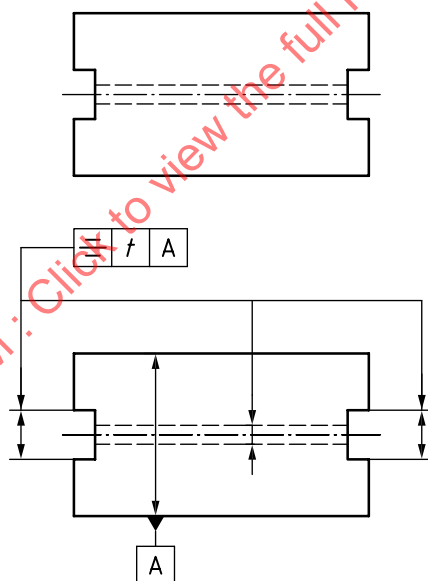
Drawing and meaning of general symmetry tolerances, single datum
